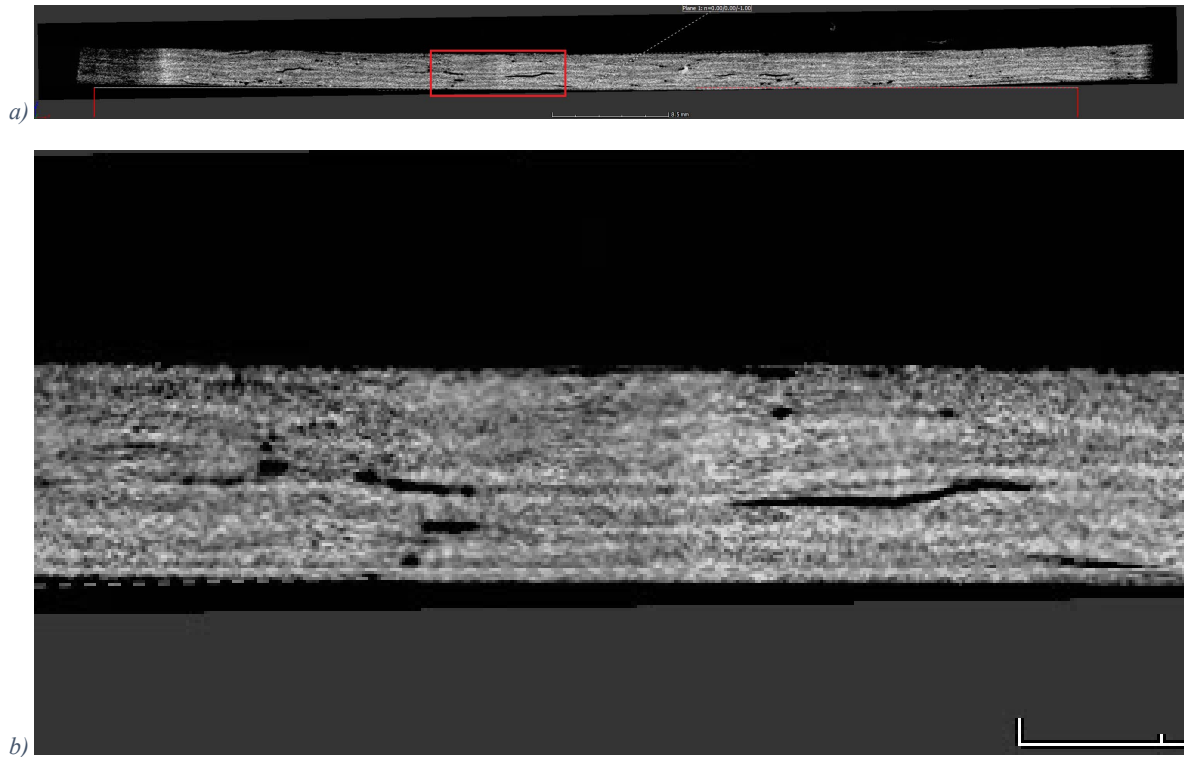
Cross sectional view of specimen from top of seatback (Location A) with a) full specimen and b) enlarged view.
